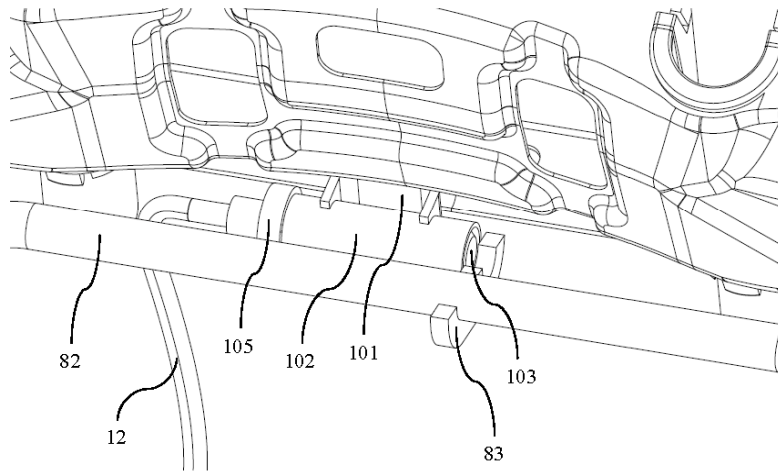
View of the trigger lock at the moment when it is released by the Bowden cable after the lower assembly moves backwards
